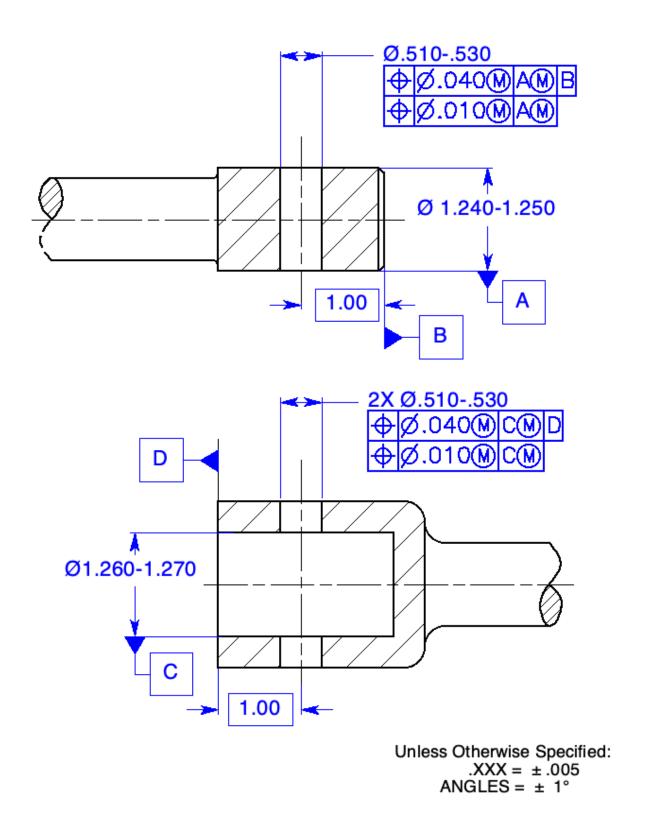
Multiple single-segment positional tolerancing to control holes: Prob. 23.
